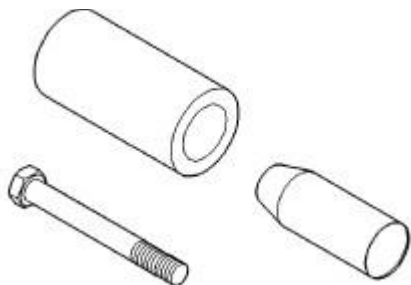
Front Crankshaft Oil Seal Installer 6780
